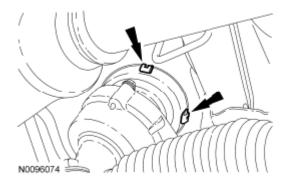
Locating Steering Gear-To-Dash Seal And Clips Courtesy of FORD MOTOR CO.
